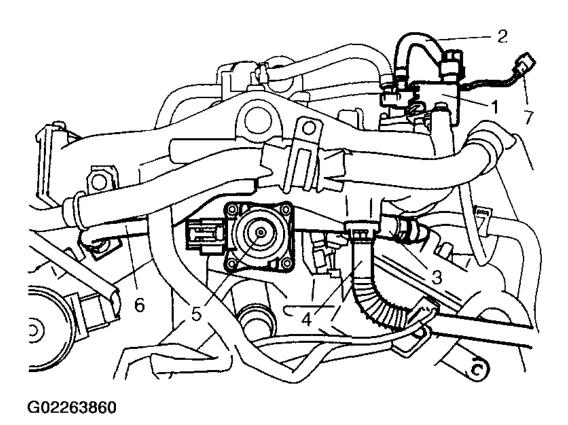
Detaching EGR Pipe From Exhaust Manifold Courtesy of SUZUKI OF AMERICA CORP.
